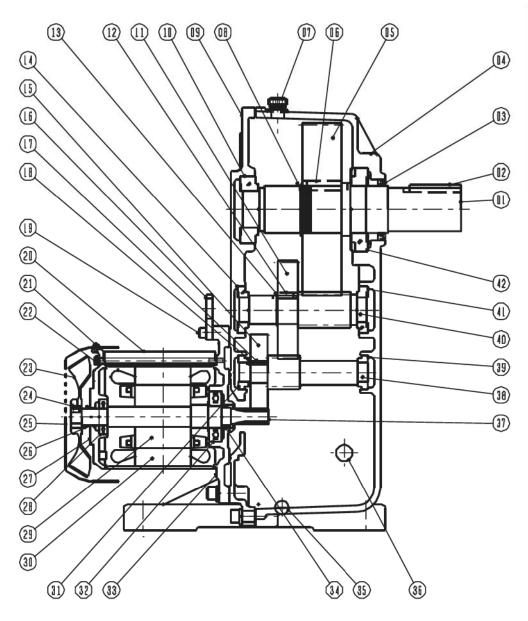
3stage of gear Unit Grease Lubrication type (Gear size TM,TN,TP)
